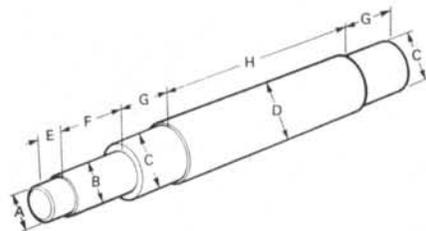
When installing Borg and Beck independent type clutch, use a pilot shaft made to dimensions shown to align clutch discs.
